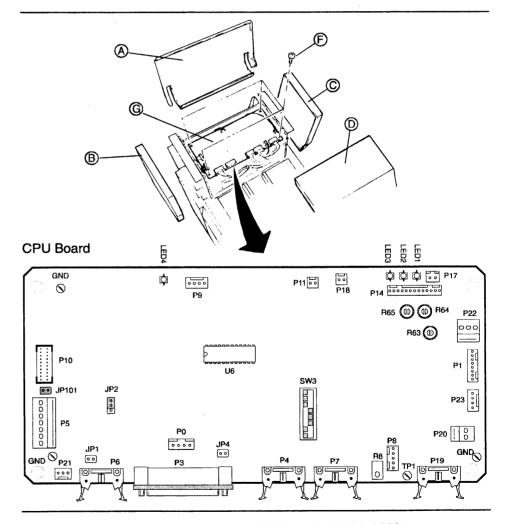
Removing the Upper CPU Board (PAGS-1000)
